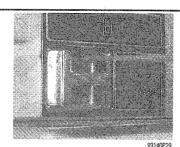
If the inside door handle seems to stick out too far, it's probably broken. It is not necessary to remove the entire door panel to repair the handle. Unfasten the retaining screw
